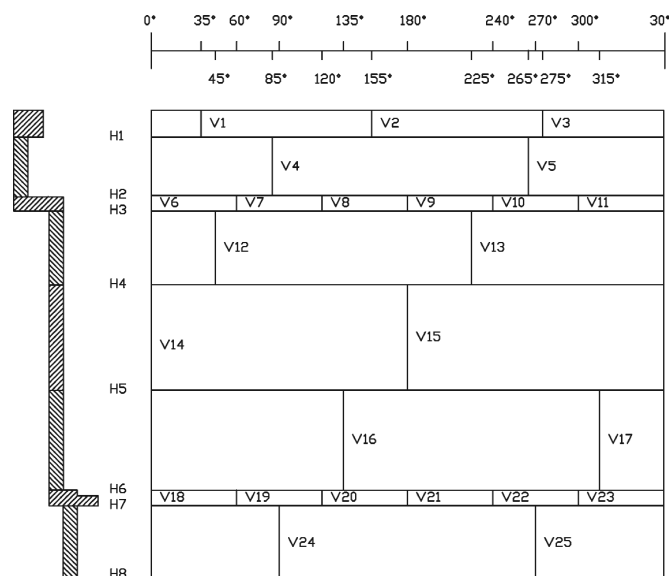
BWR CORE SHROUD WELD DESIGNATIONS
